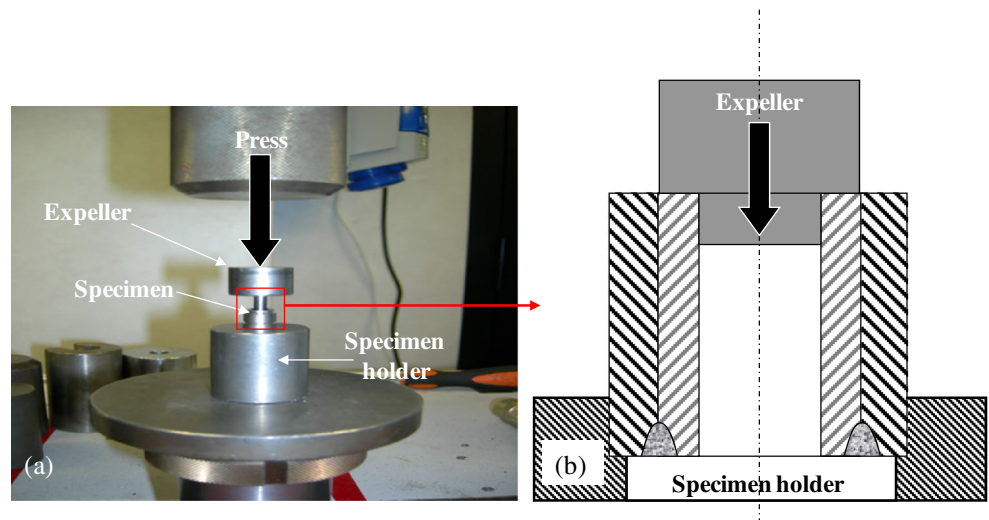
a View of the experimental setup for the push-out test of the weld. b Cross-sectional draft of the specimen
